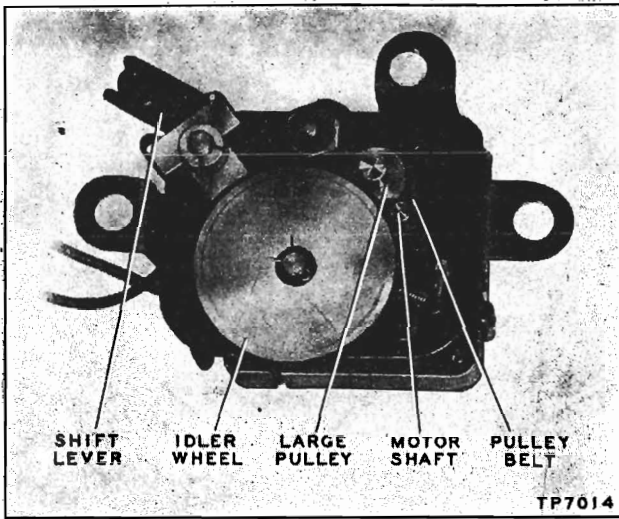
Motor, Showing Pulley, Bolt, and Shift Lever
